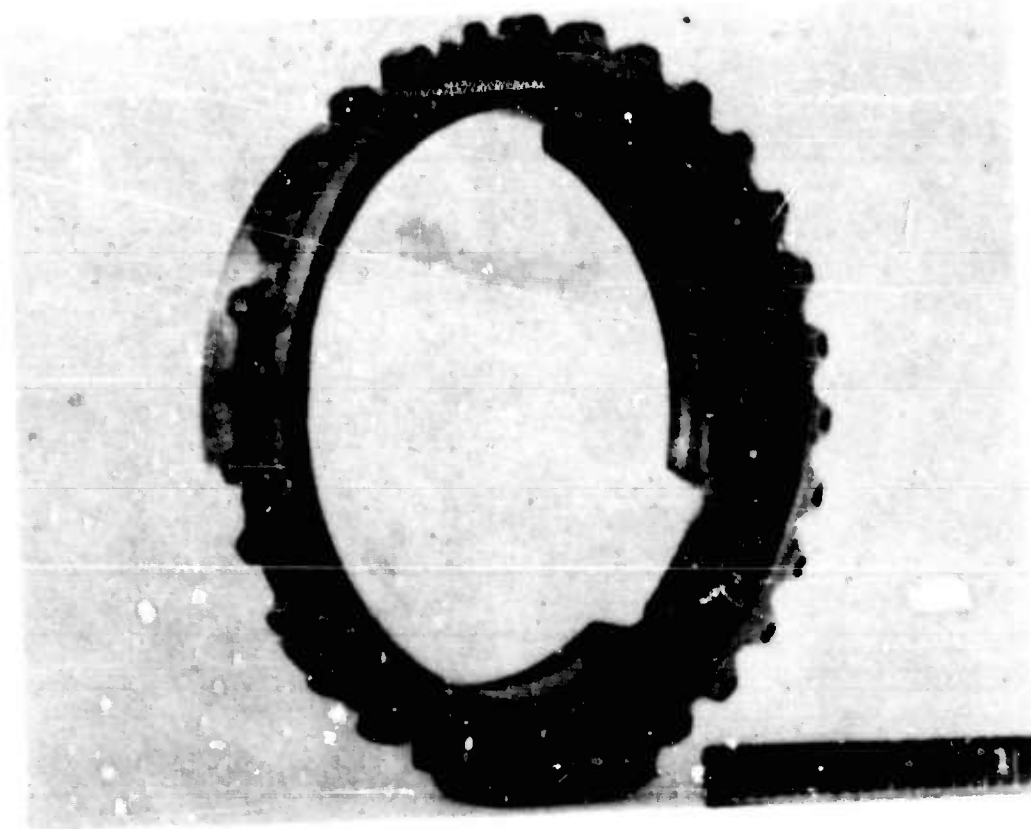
B26005: Third and Fourth Gear Synchronizer Clutch. Note Irregular Wear on Inner Surface.
